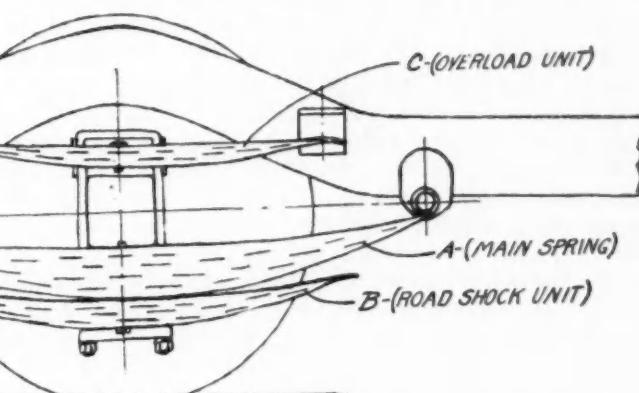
Rear Spring Suspension (Underslung) Custom Built Cradle Compensating Main and Cradle Helper Combination on Bus Chassis of 12-25 Passenger Capacity
